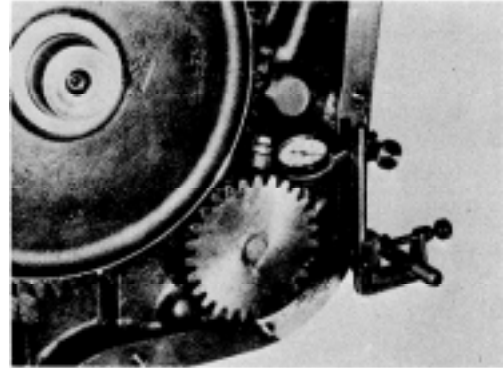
, (N114129). Checking lubricating oil pump gear backlash
